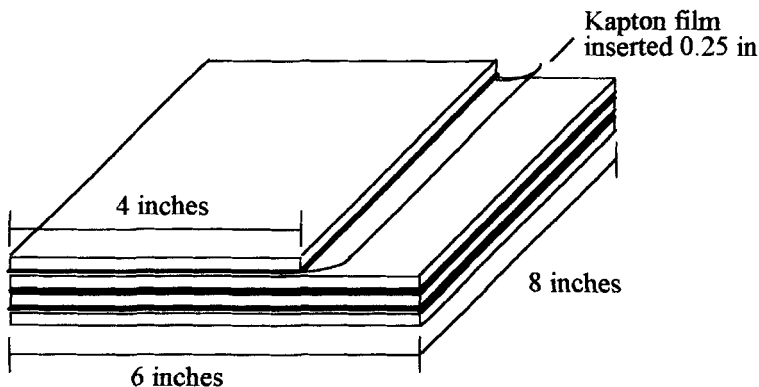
Dimensions of the Cracked-Lap Shear panels before cutting into specimens.
